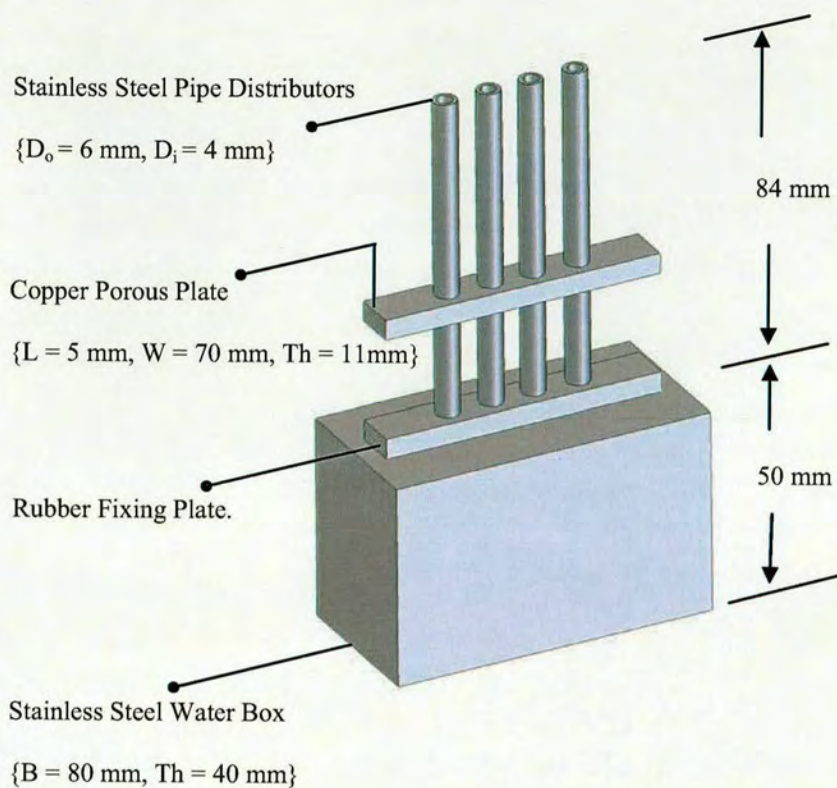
Drawing of test section inlet chamber, indicating major components coupled with their actual realised dimensions.
